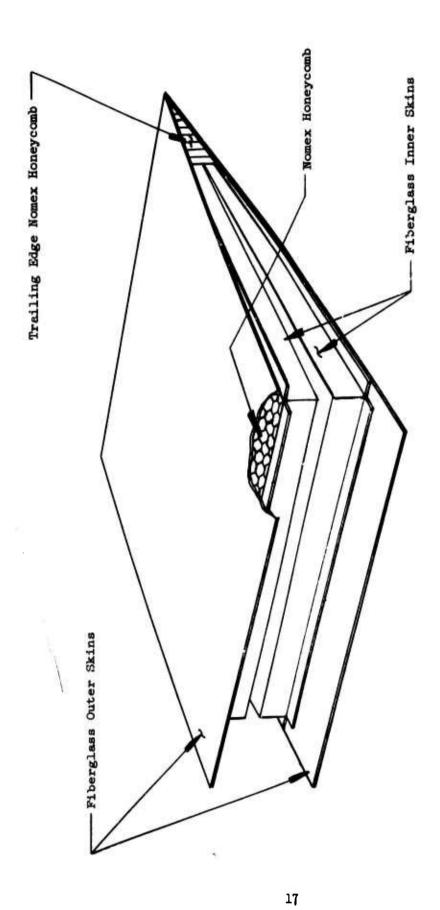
Fiberglass Skins/Honeycomb Core Design.
